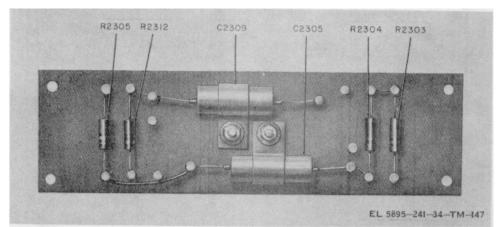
Power Supply PP-2795/FSW-8, terminal board TB2302, parts location.
